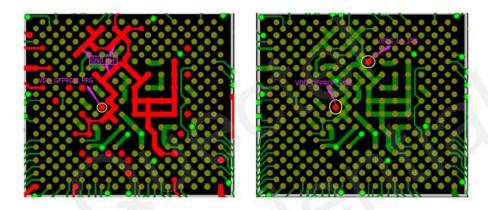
PCB Designs of BG96 R1.1 and R1.2
